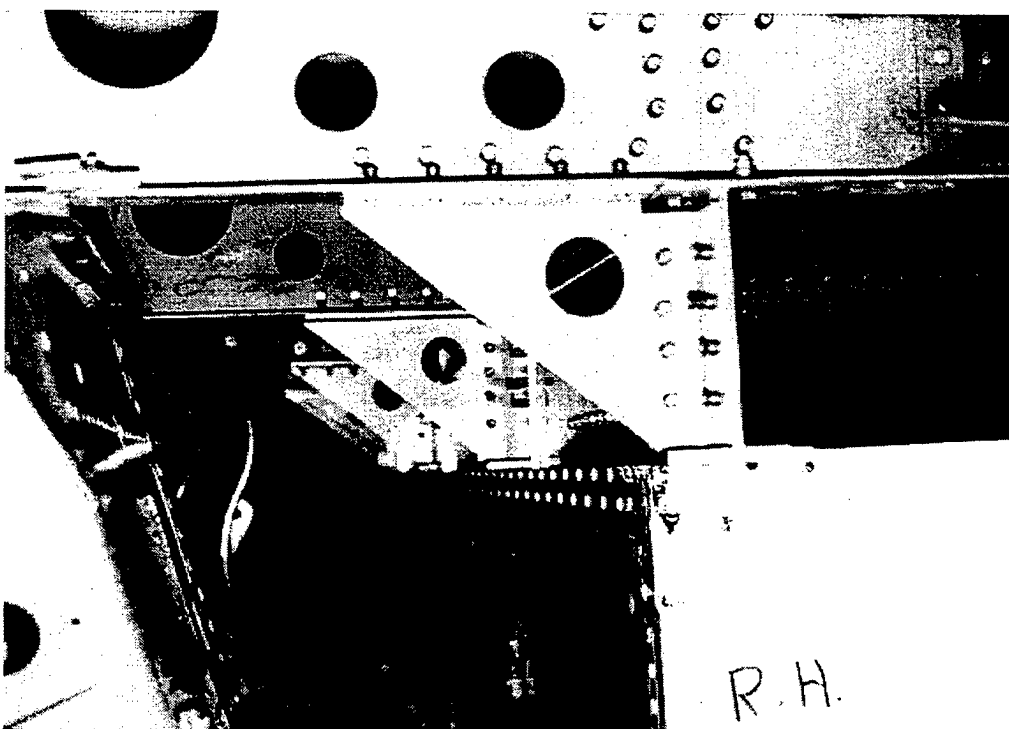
PRETEST AUXILIARY FUEL TANK RIGHT ATTACHMENT FRAMEWORK
